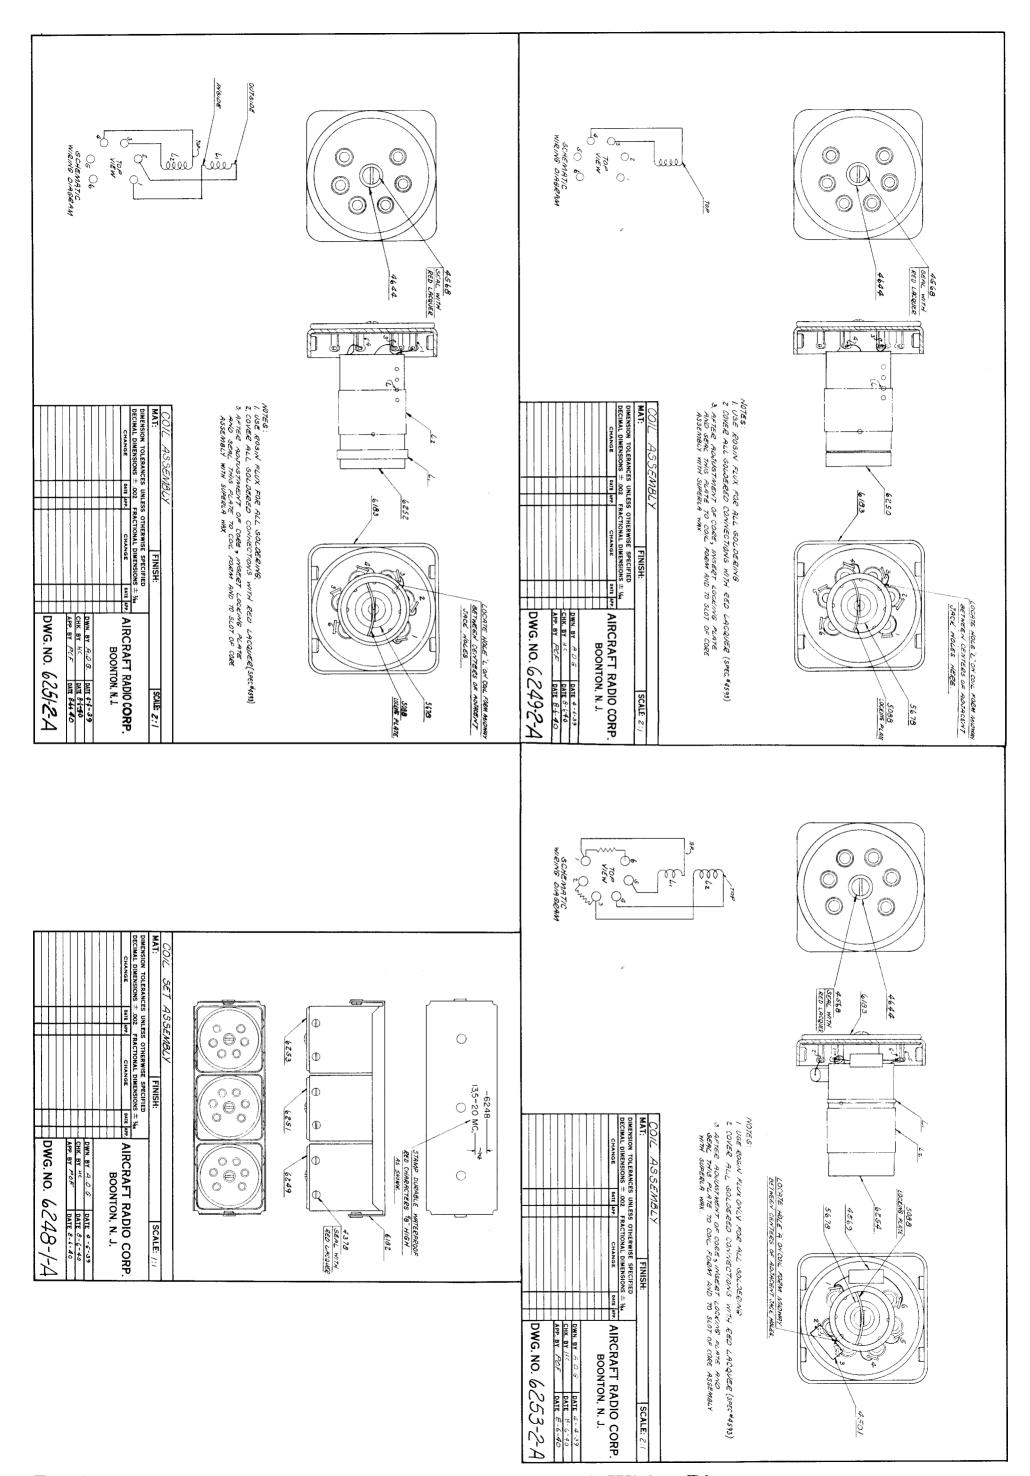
RF Coil Set Assembly 6248, (13.5-20 MC) with Wiring Diagrams
